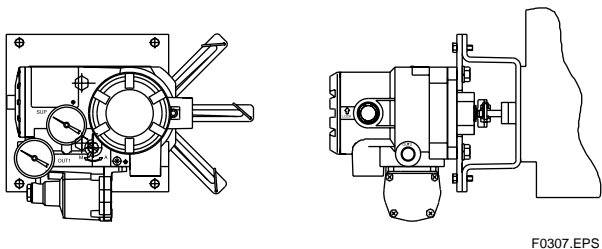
YVP Installed on Rotary-motion Valve/Actuator
